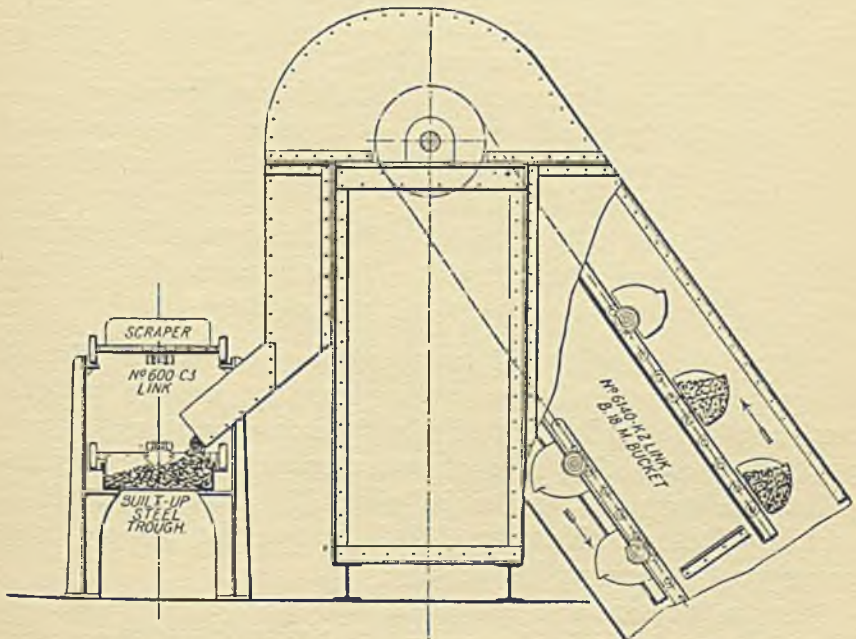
Section of Scraper Conveyor Fed by Elevator.
